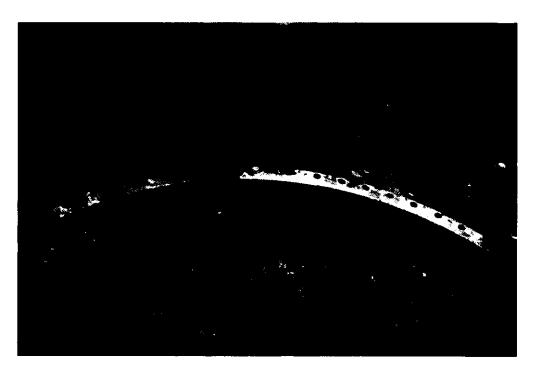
, General view of the segment of outer slewing ring which fractured. The surface shown would have been in contact with the upper flange.
